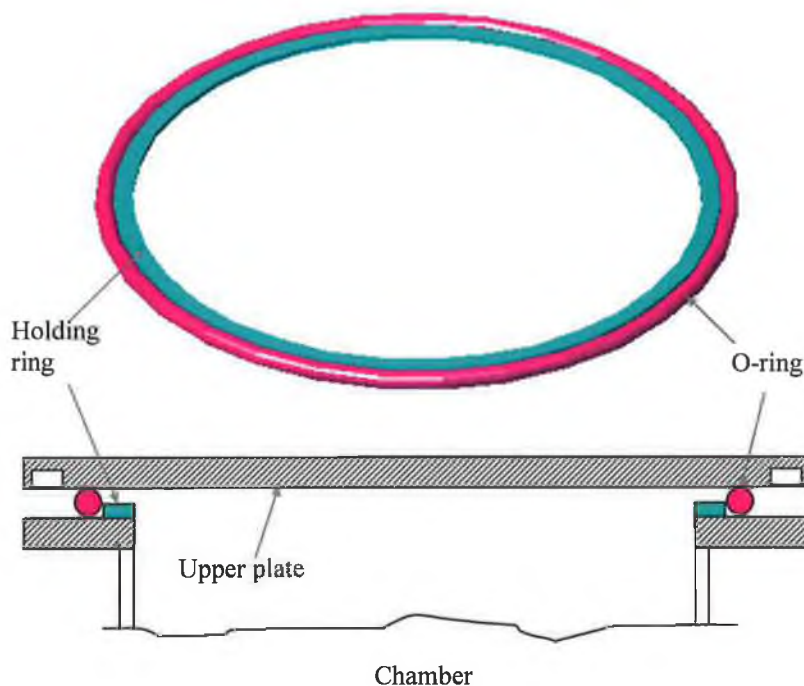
O-ring holding metal ring between the upper plate and the chamber.
